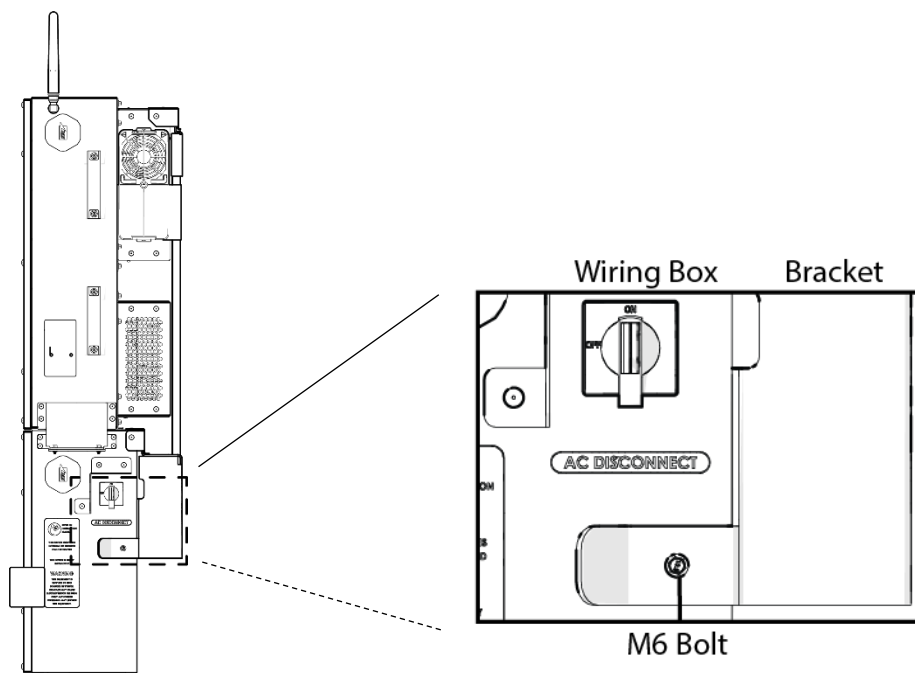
M6 Connecting Bolt (Right Side Shown)
